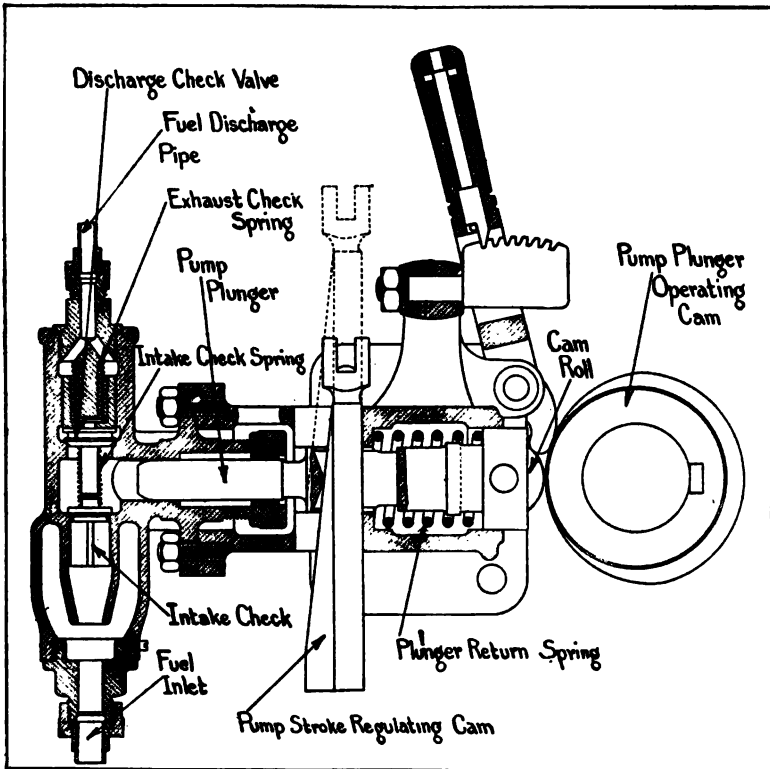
Sectional view showing construction of fuel supply pump on the Koerting-Diesel engine.
